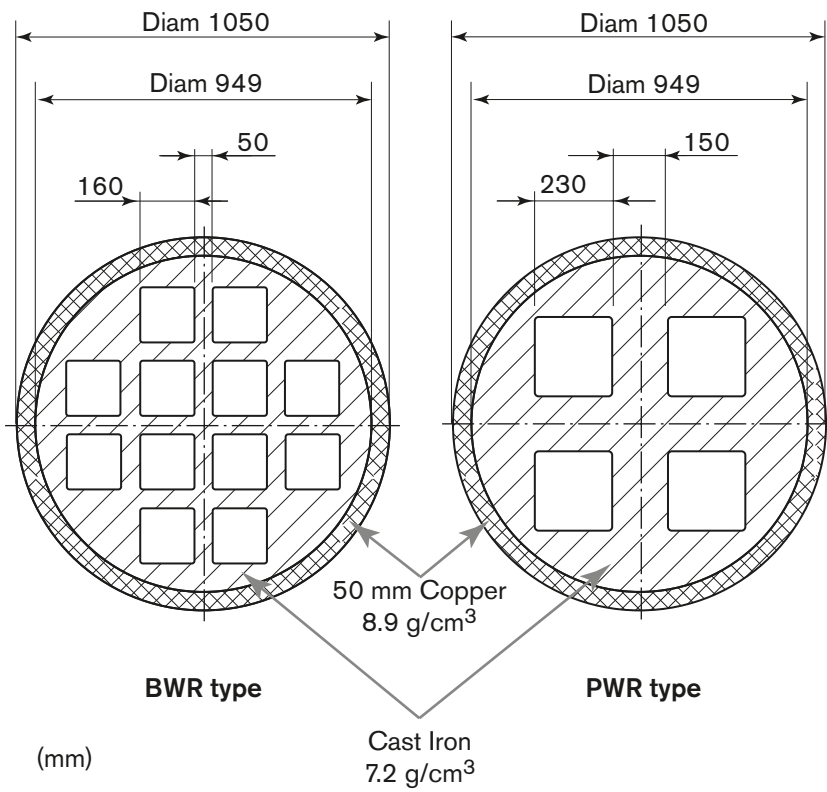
The figure shows the schematic design of inserts for 12 BWR or 4 PWR assemblies for canisters with a 50 mm thick copper shell.
